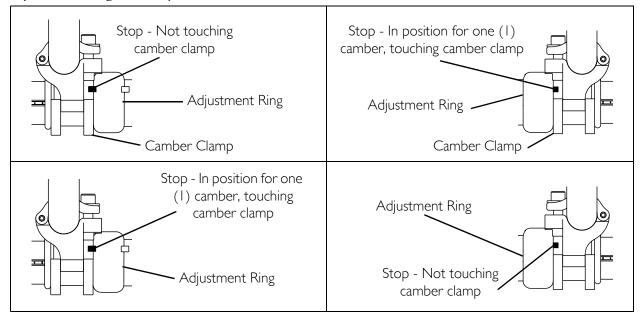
Adjusting Toe In/Toe Out - A4 Camber System- Fine Adjustment
